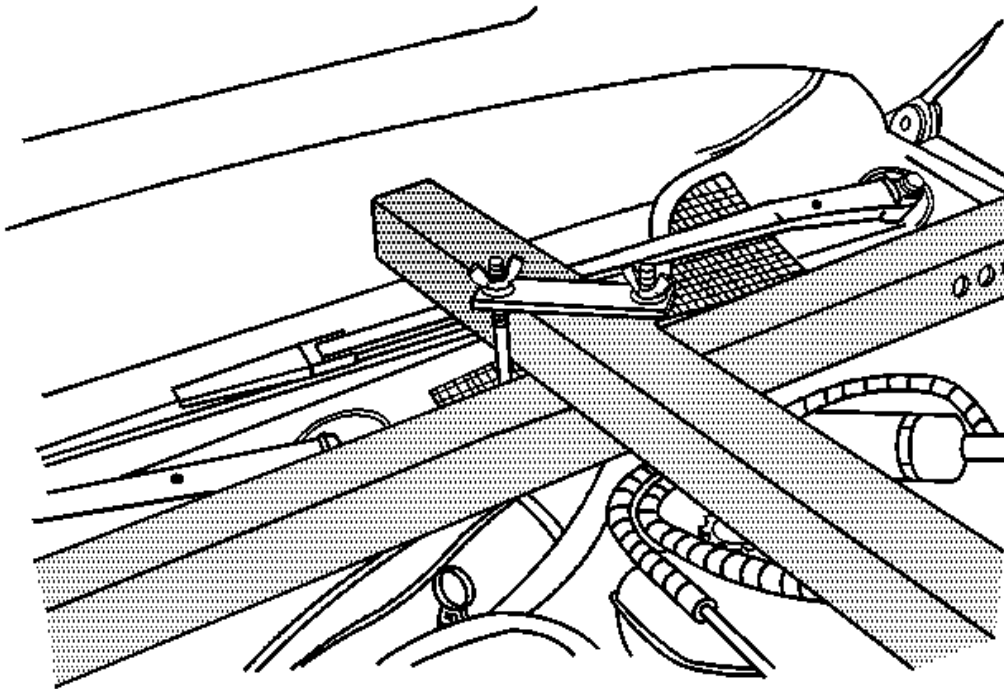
View of Cross Bracket Assembly with J28467-1A & Nuts
